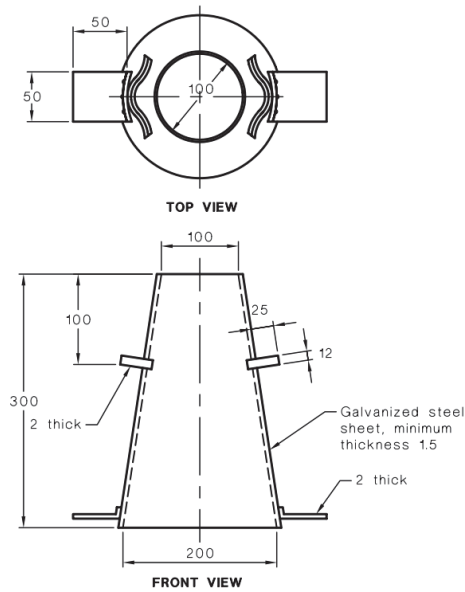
Typical mould for slump test (AS 1012.3.1-1998)
